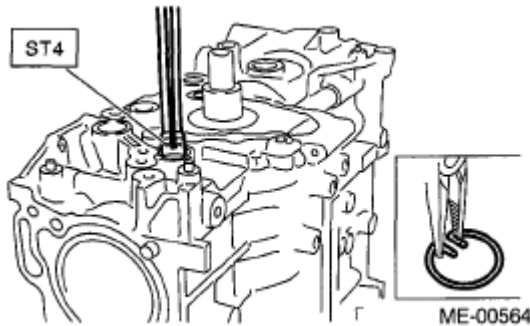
Identifying Piston Pin Snap Ring Pliers
